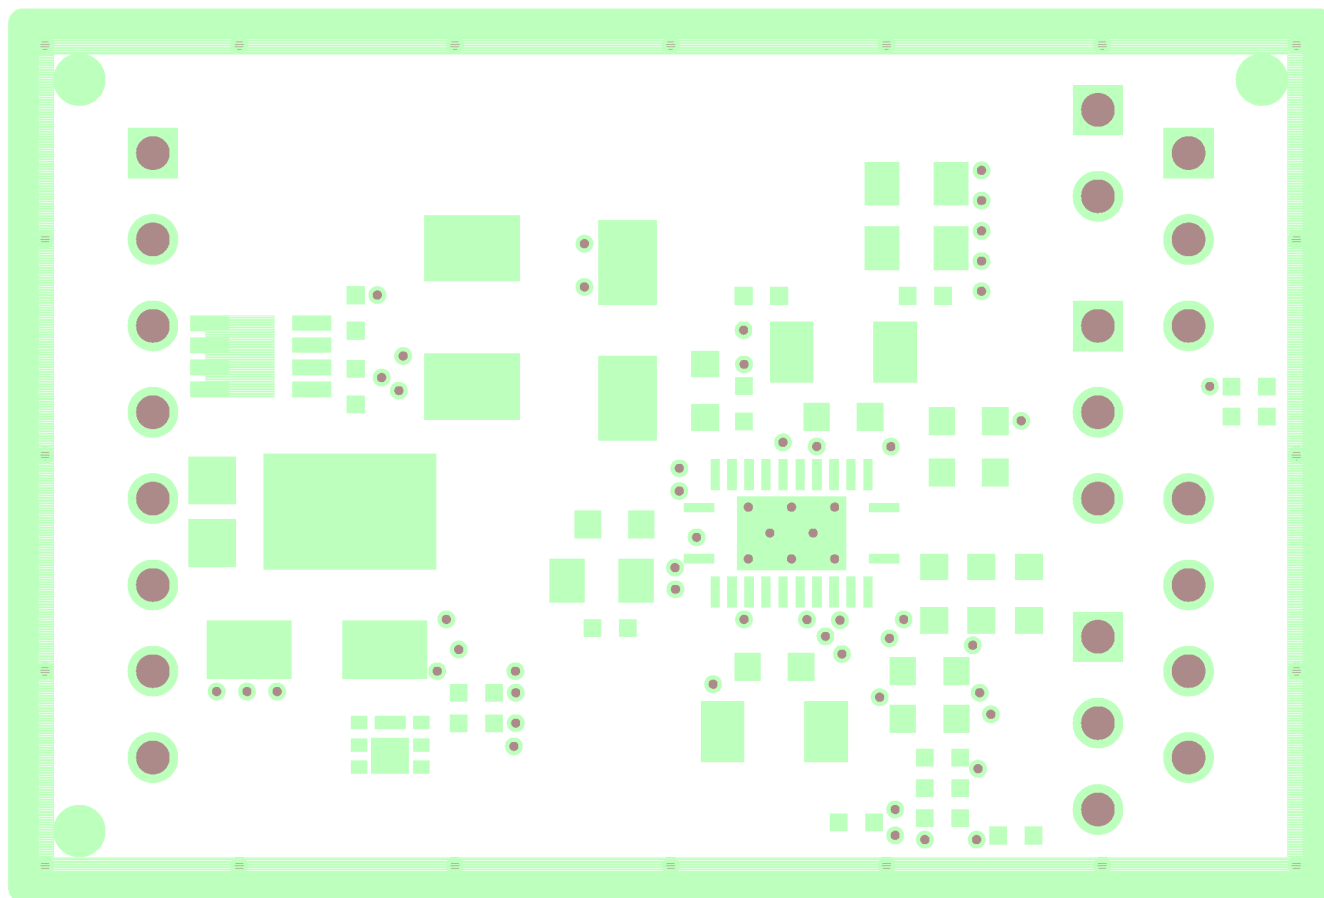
SMP-BQ24133-MVK Board Solder Mask – Top Side
